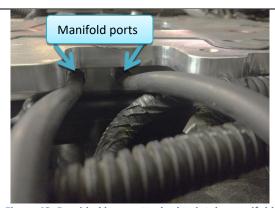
Provided hoses attached to intake manifold adapter on driver side.
